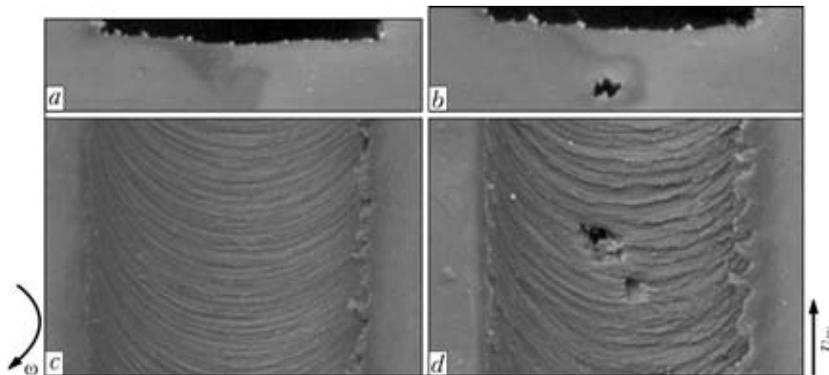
Appearance of cross-sections (*a, b*) and face surfaces (*c, d*) of welds produced by FSW using tools with smooth side surface of the tip in the form of a truncated cone of the length of 2.9 (*a, c*) and 3.2 (*b, d*) mm
